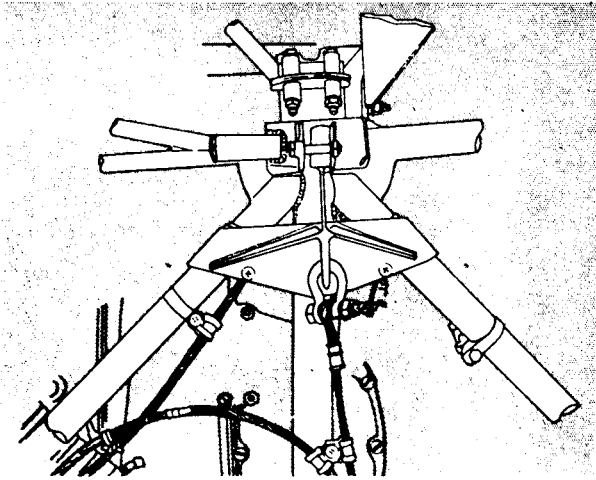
Typical cargo sling installation No. 1 (showing fuselage attachment fitting).
